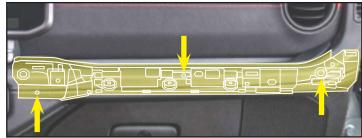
Figure G: Remove the trim panel, then the (1) Phillips screw and (2) 8 mm bolts
